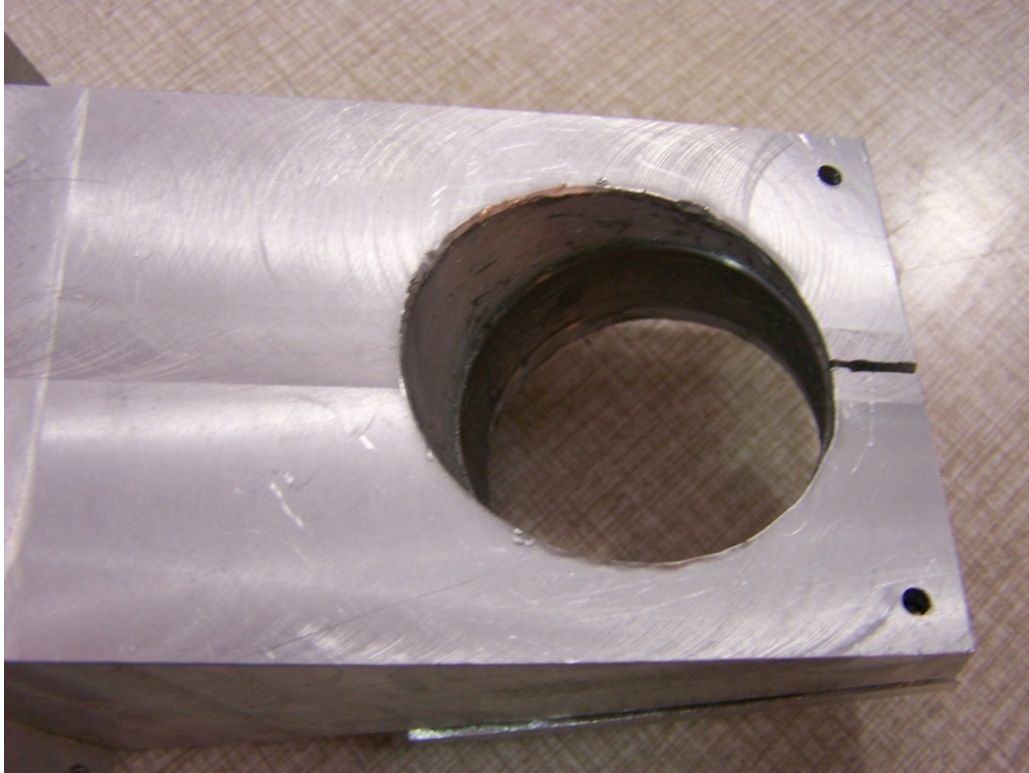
Shaft impacted aluminum support causing deformation of the support. Outer race of ball bearing remains in the support.
